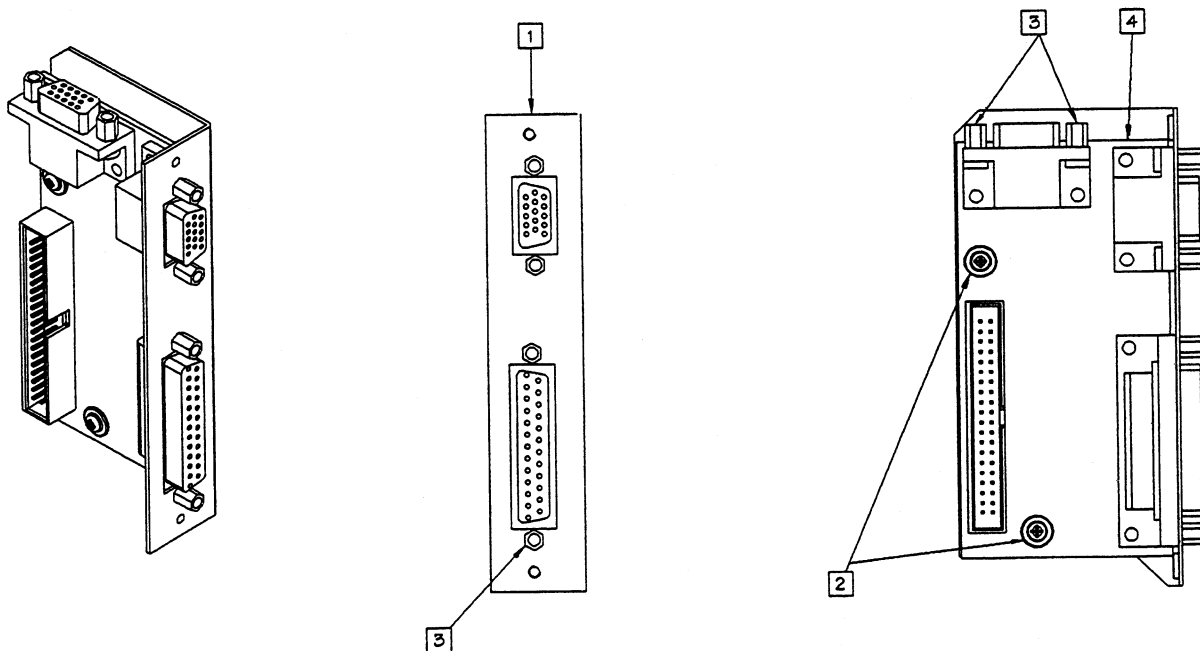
LC574A Centronics & VGA Interface Assembly
